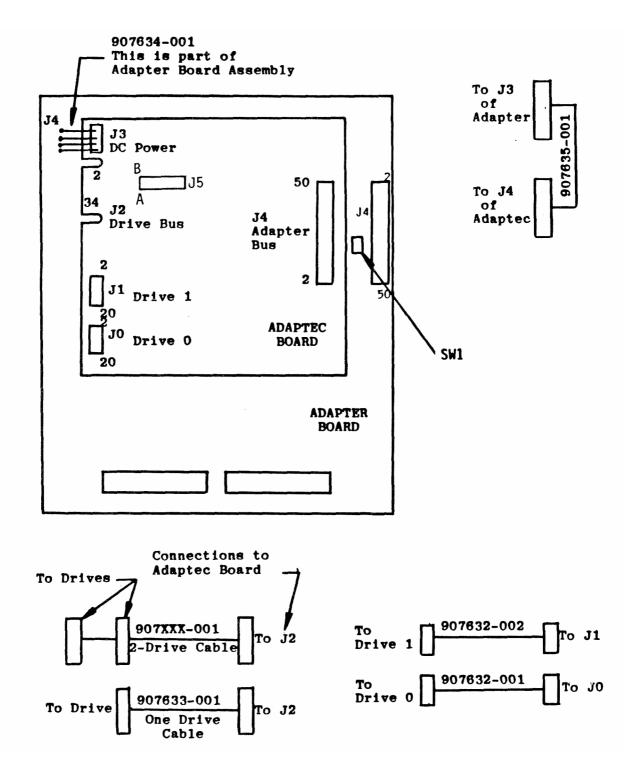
Location of Jumpers on the Winchester Drive Controller PCBA
